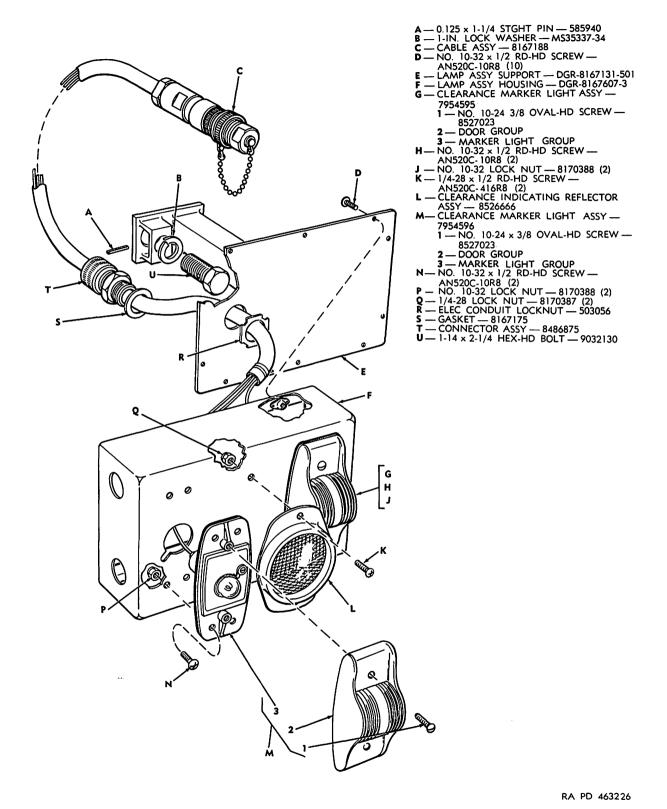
Clearance lamp assembly - disassembly and assembly - typical.
